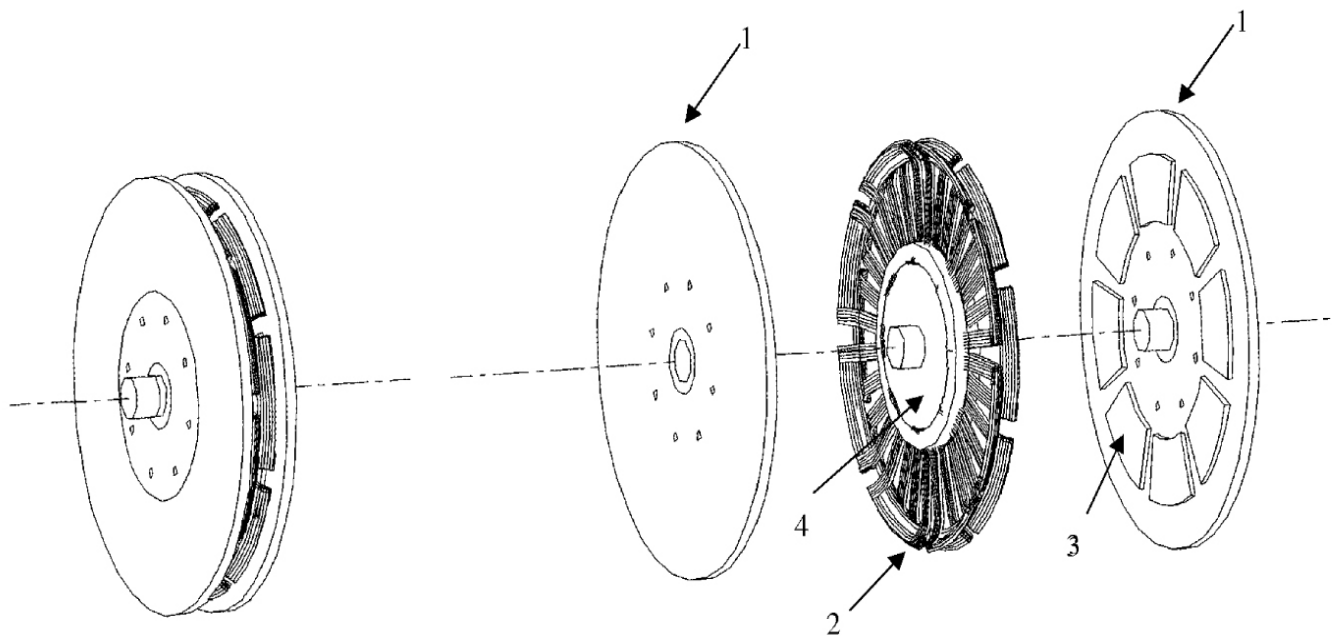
Exploded view of an AFPM machine: 1 — rotor disc, 2 — stator winding, 3 — PM, and 4 — epoxy core.
